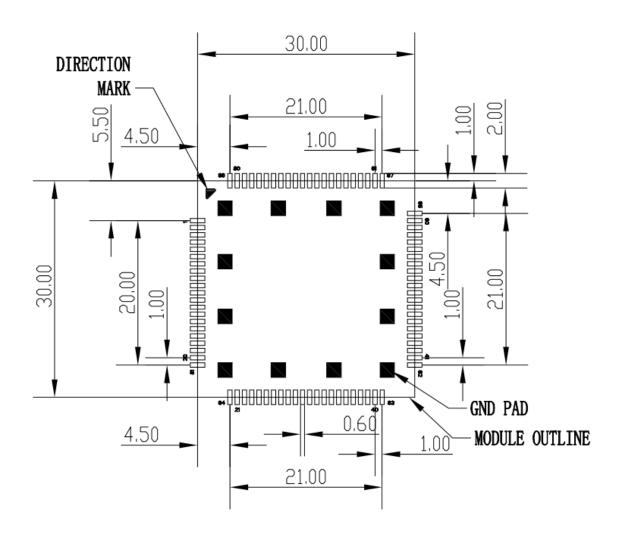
RECOMMENDED LAND PATTERN (Unit: mm) (detail A)
